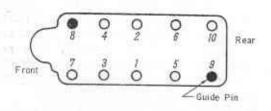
Tightening Sequence of Cylinder Head Bolts
